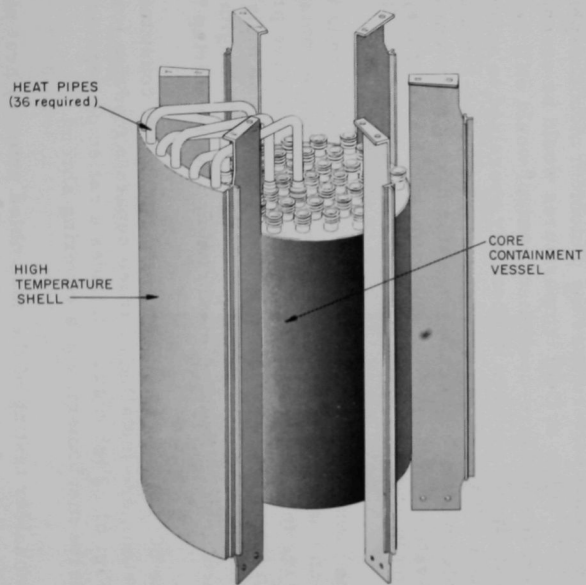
Core Containment Vessel with Heat Pipes and High-temperature Shell Installed
